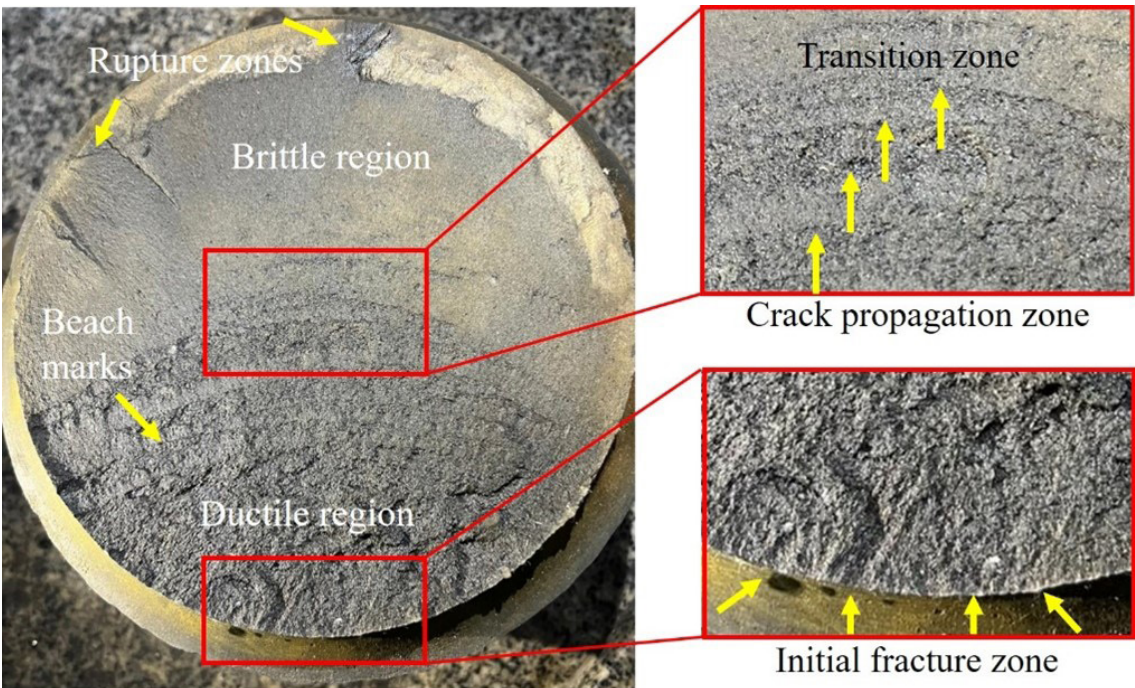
Observed shaft fracture surface features indicating fatigue failure.
